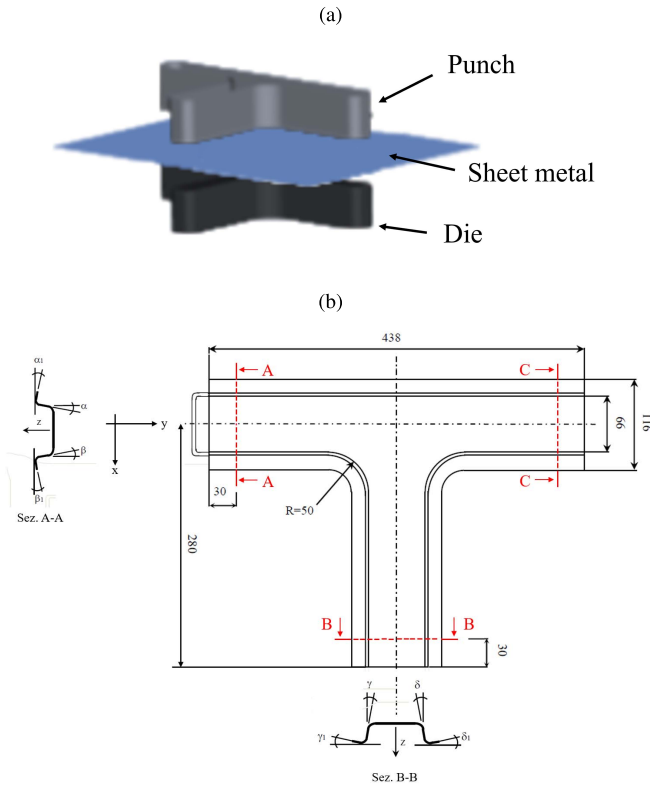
‘T-shape’ steel component: deep drawing mould (a) and mechanical scheme indicating the critical points A, B, and C (b).
